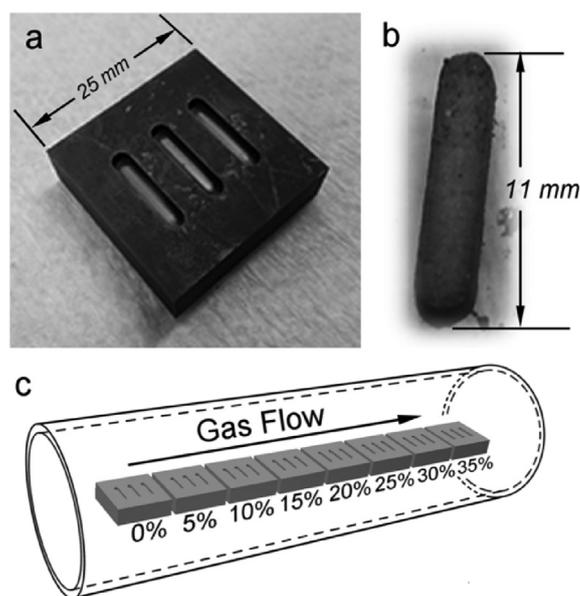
(a) Graphite mold used in processing the samples. (b) Typical sample pellet after release from the mold. (c) Arrangement of the samples in the tube furnace for heat treatment.
